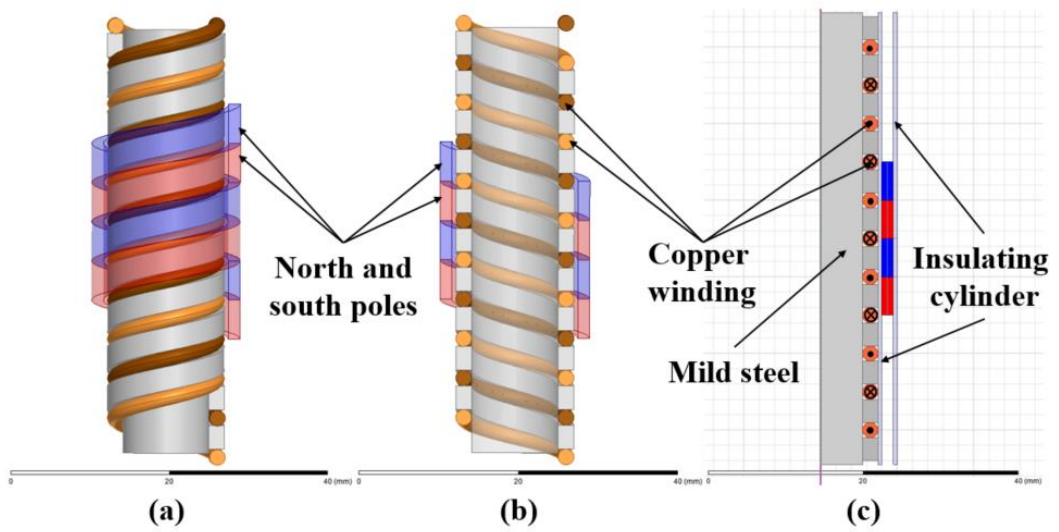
Single sided fixture (a) 3D view, (b) Cross section, and, (c) 2D view.
